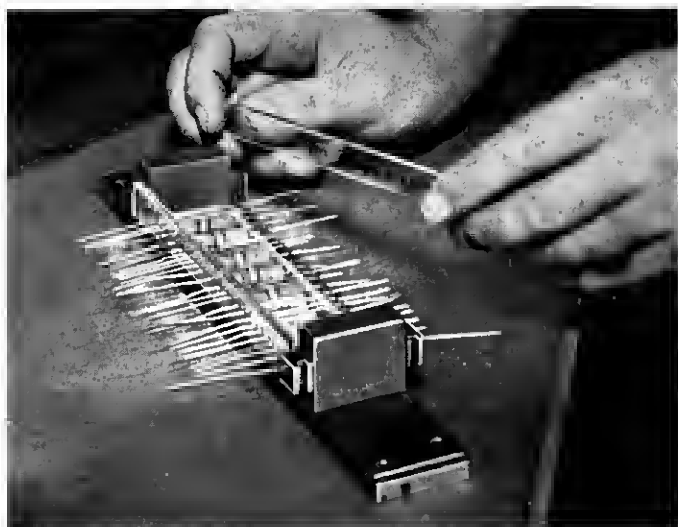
Thermoplastic strips being positioned in assembly jig for pigtail components. The strips are precut to length from extruded "ribbons" and are stamped with equipment designations to identify the components.
